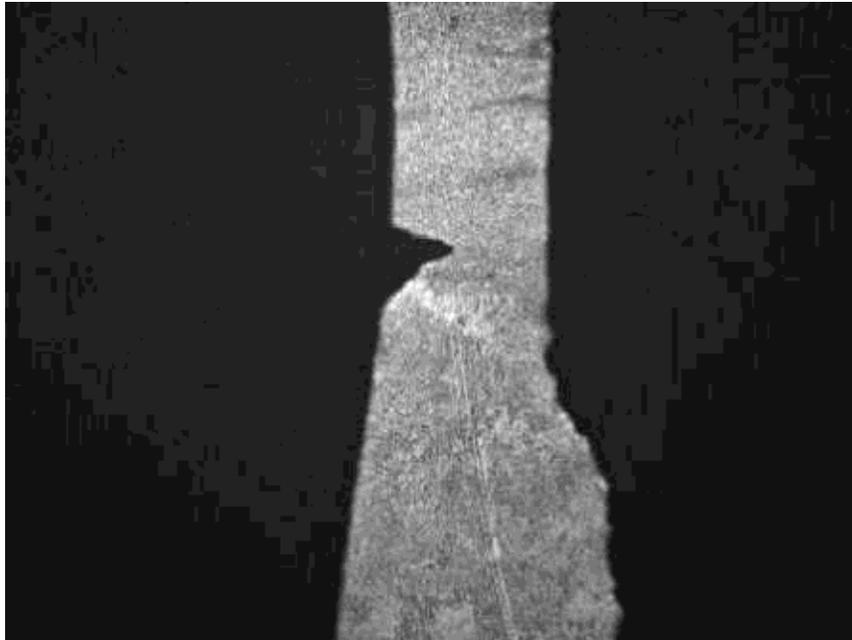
GENERAL MICROSTRUCTURE OF JT9D TURBINE EXHAUST CASE WELD
